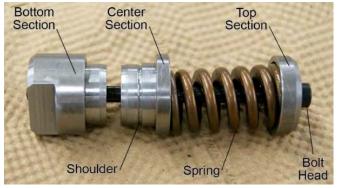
ST-531, Connecting Rod Bushing Press-Out Verification Tool
